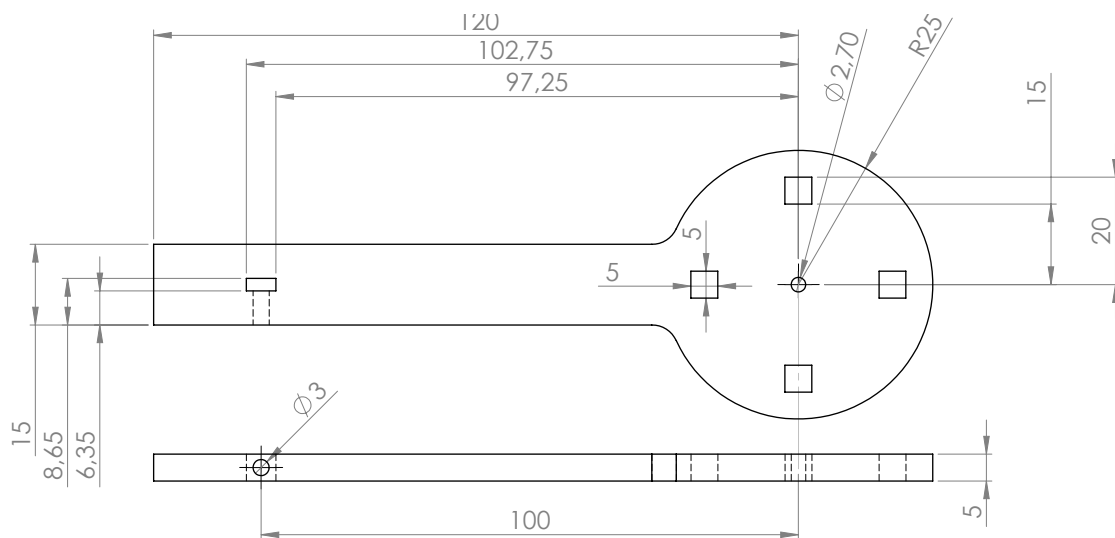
Dimensions of the large internal part of the validation set-up from Figure 34. Dimensions in mm.
